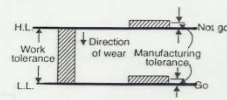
Manufacturing Tolerance (Plug Gauge)
